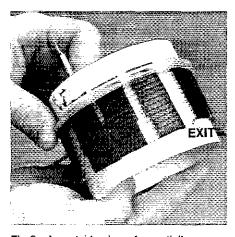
An outside view of a partially assembled W8NX trap. The bottom winding starts at hole "1" and reenters the form just below the "EXIT" hole. The wire then comes back through the inside of the form to hole " $2_i$ " and is used to make a second winding atop the first. It reenters the form at the "EXIT" hole.
